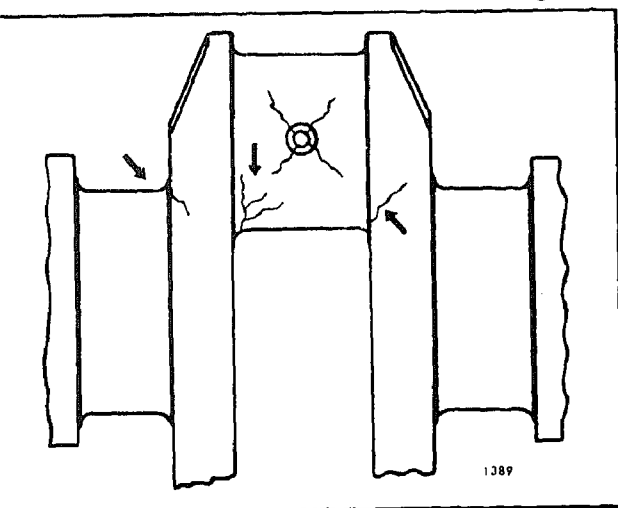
Crankshaft Fatigue Cracks
